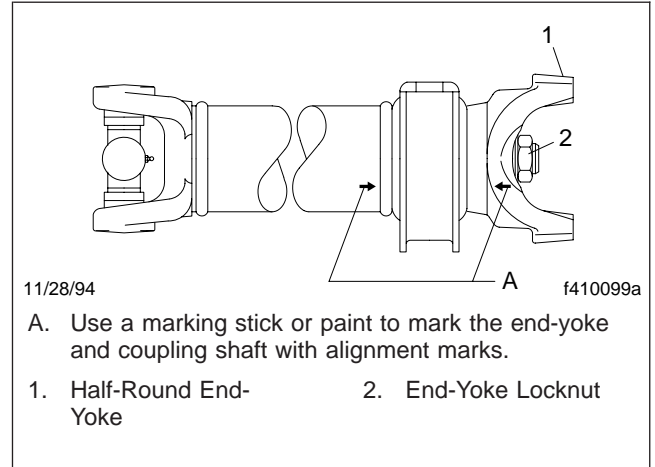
, Alignment Marks on a Coupling Shaft With an End-Yoke
